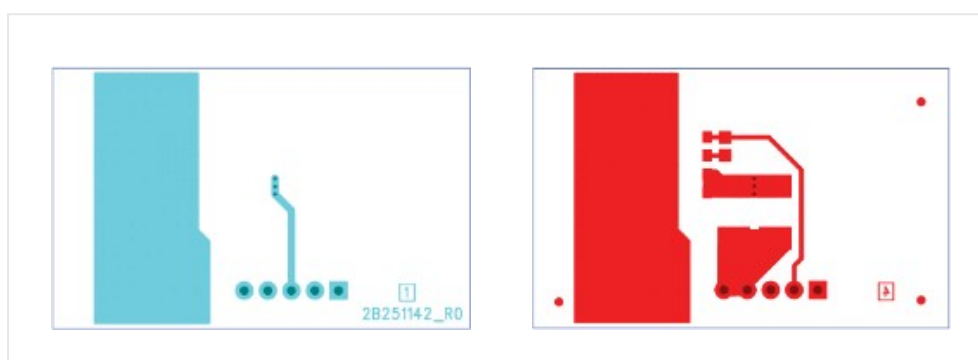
SRK2001A daughterboard layout – top and bottom sides
